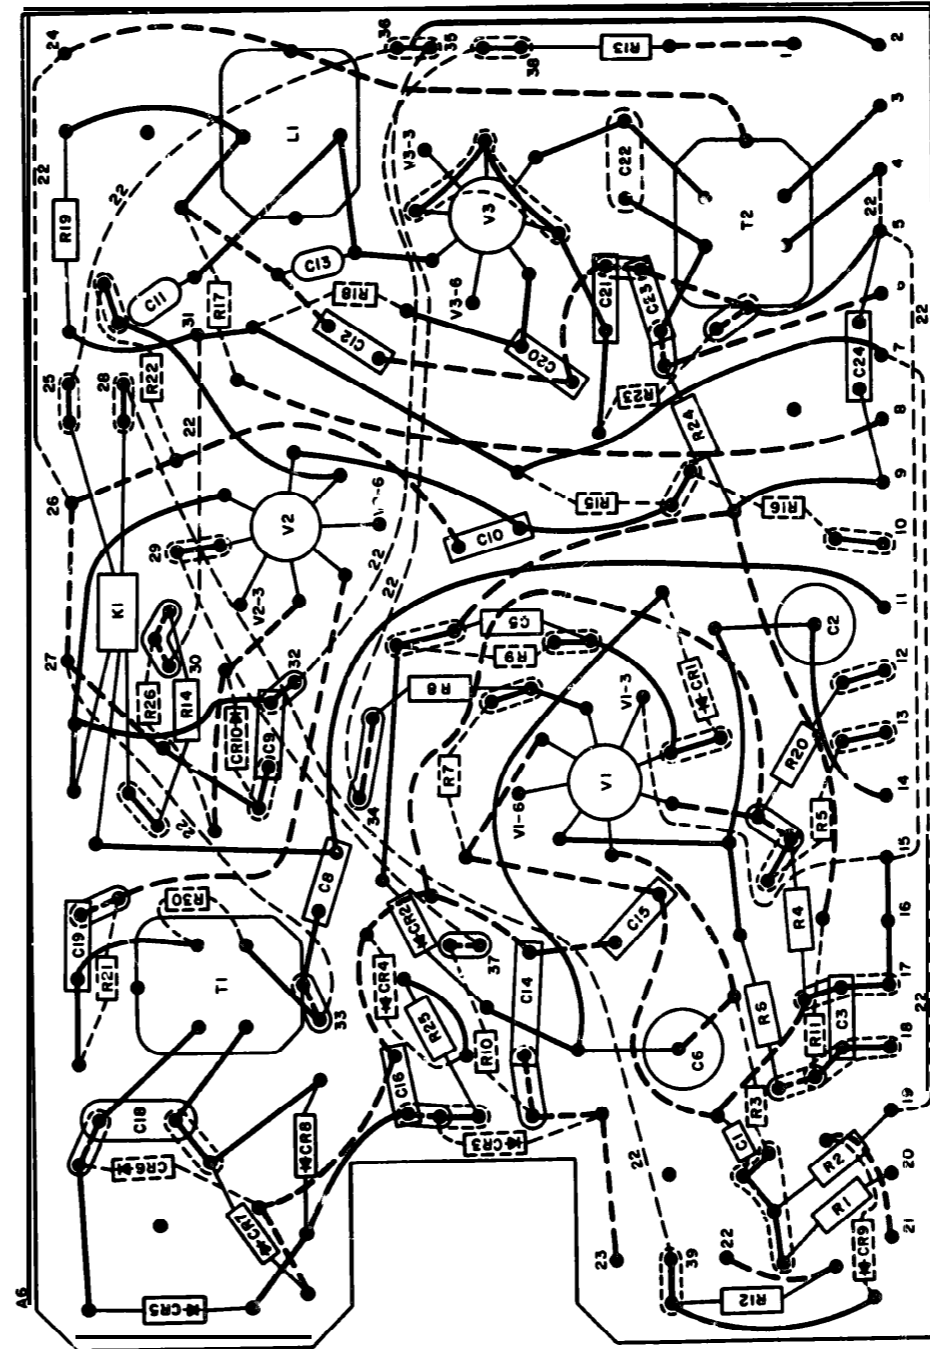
652T if unit bandpass filter assembly A3, wiring diagram and parts location
